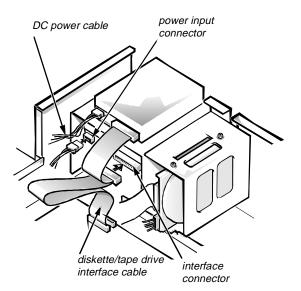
Attaching Diskette Drive or Tape Drive Cables
